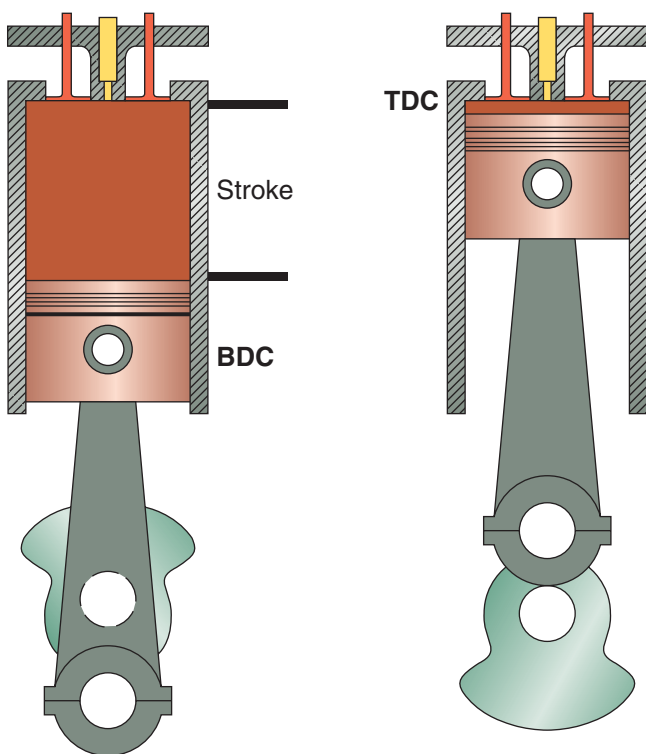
An engine with the piston located at top-dead center (right) and bottom-dead center (left).
